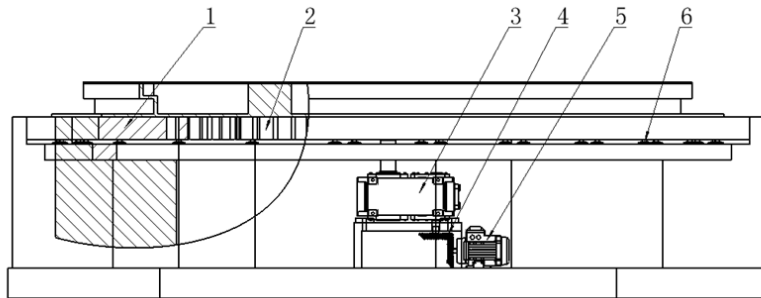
Rotating platform: 1- Slewing bearing; 2- Planetary gear set; 3- Reduction gearbox; 4- Bevel gear; 5- Bevel gear; 6- Universal ball.
